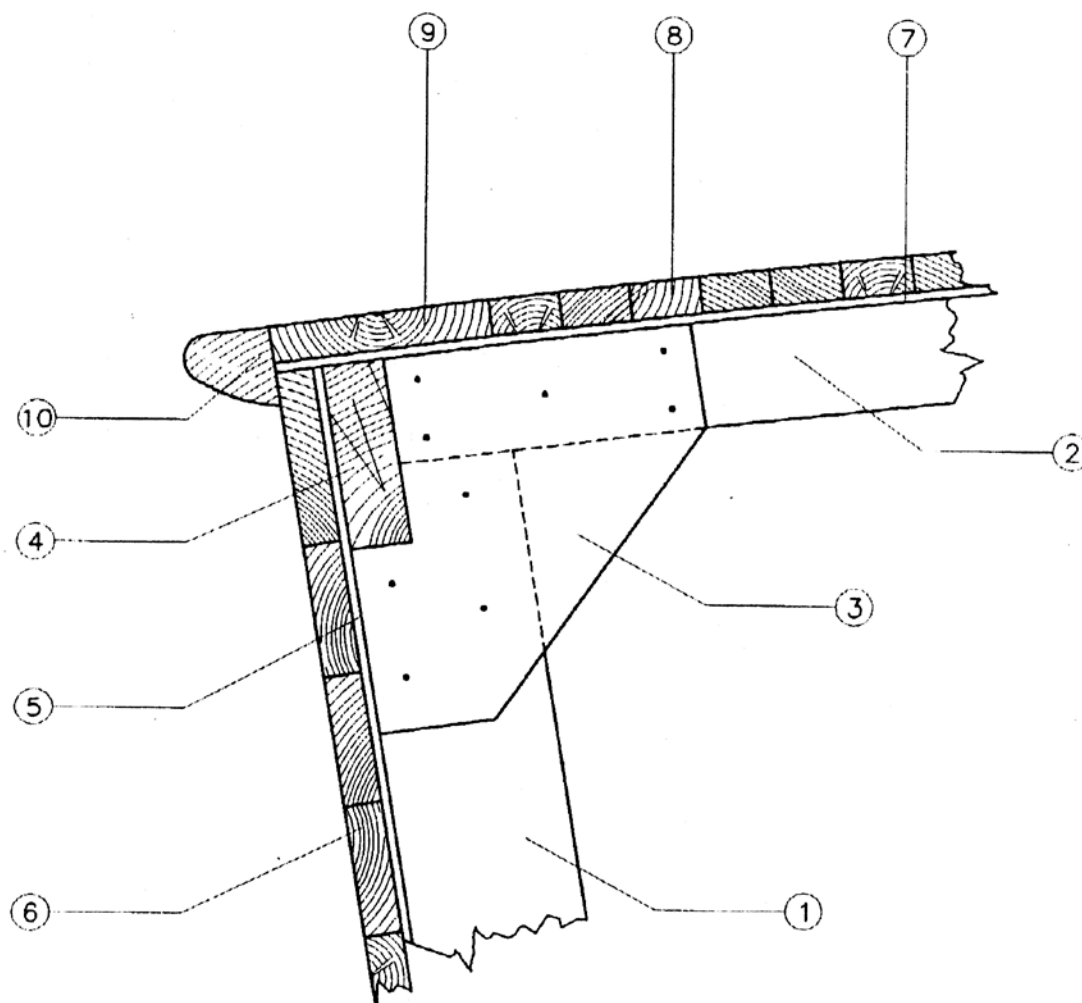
Motoryachts – Detail of Gunwale Connection
